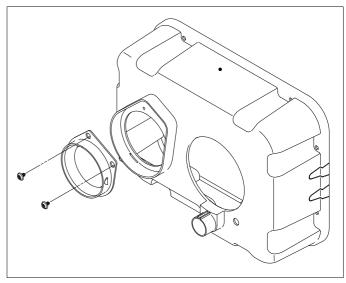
Slightly loosen 2 T20 screws of cover of heating air blower.
